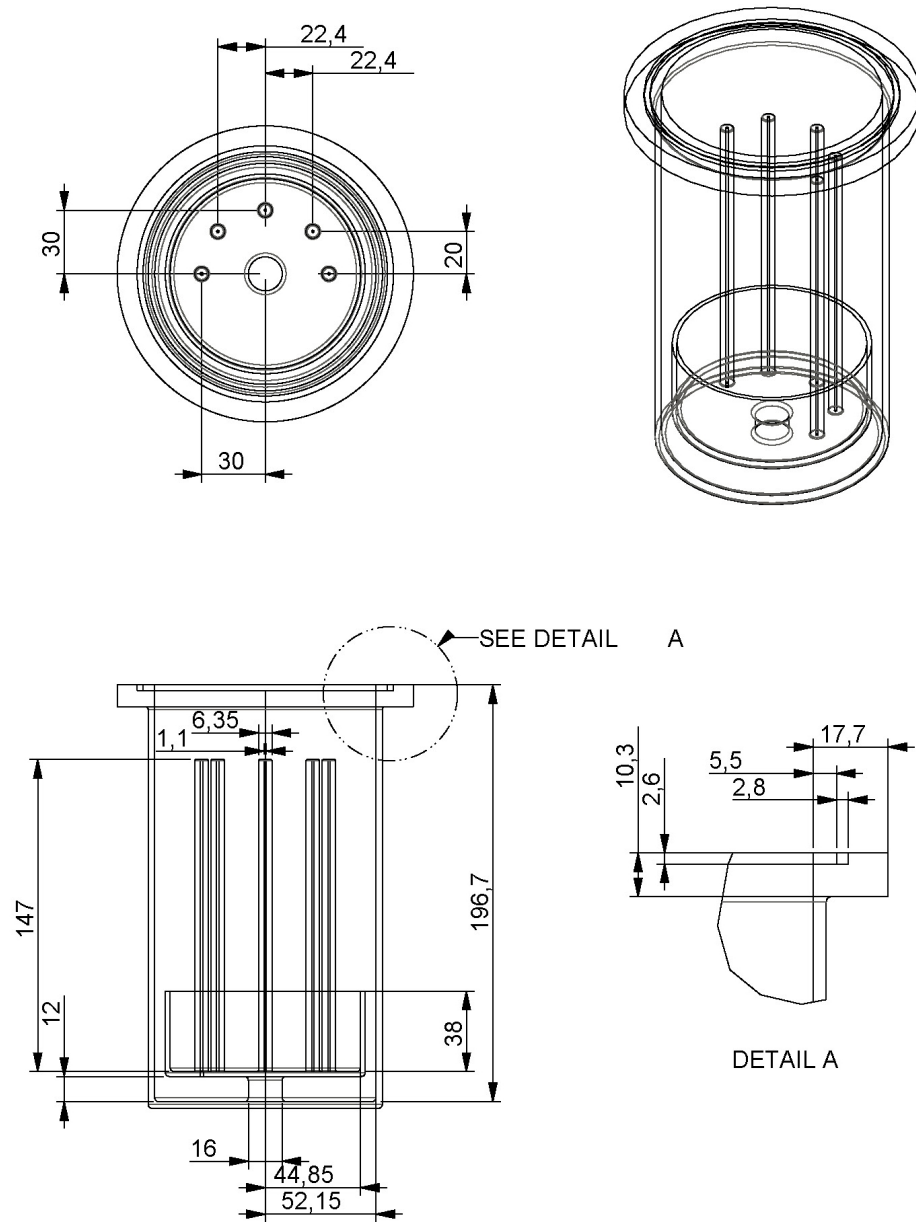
Technical drawing of container two. All dimensions are in millimeters. The tube thickness is approximately 3.1 [mm].
